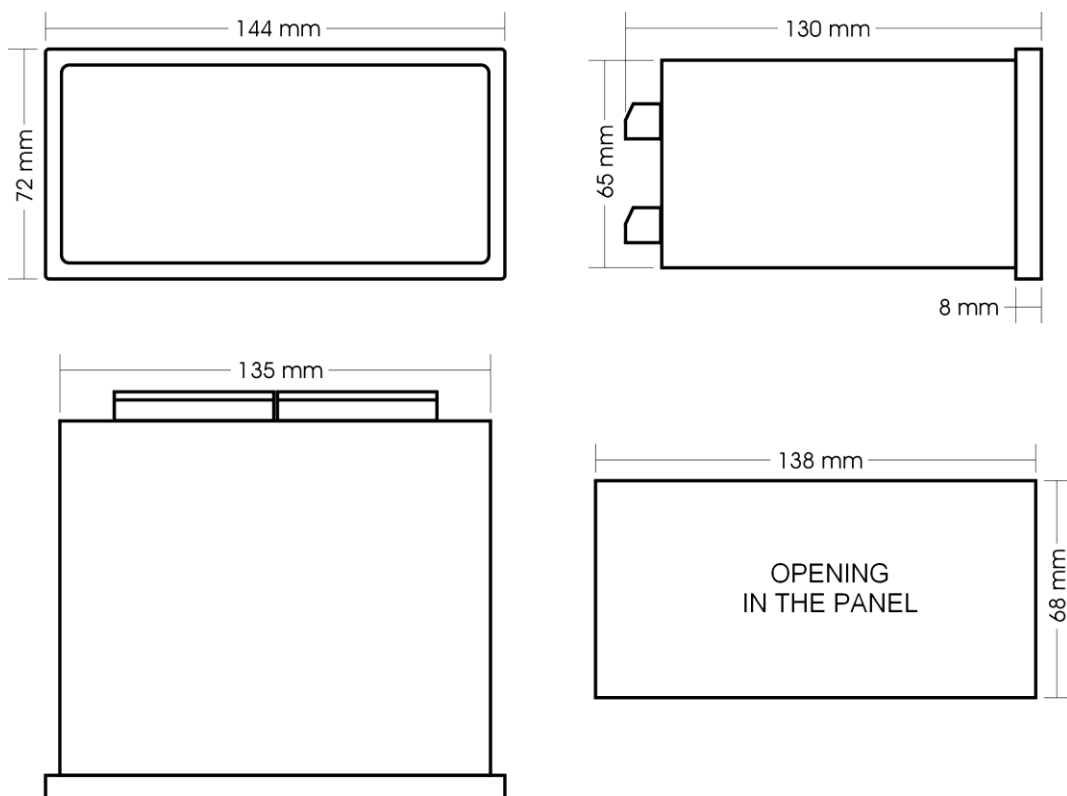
Housing dimensions and cross-section dimensions of an assembly panel
